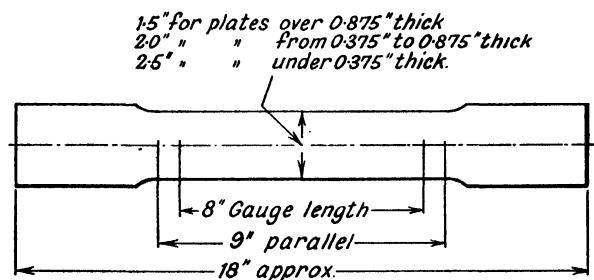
FORM OF BRITISH STANDARD TEST PIECES FOR PLATES
